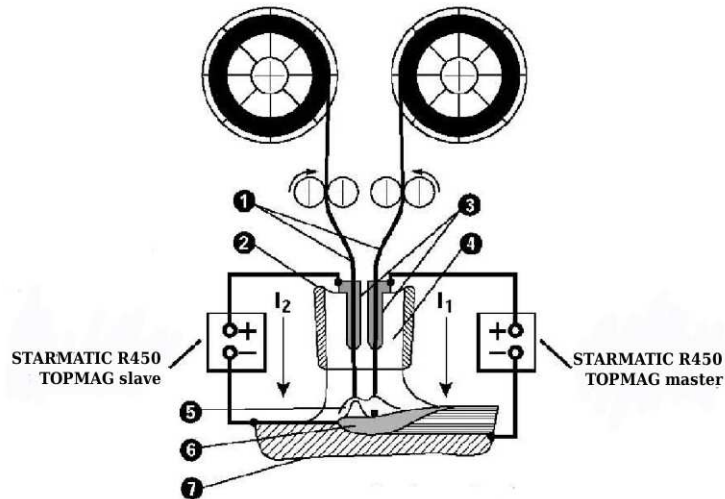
A sketch of tandem arc welding. The following notation is used: 1-wire; 2-gas nozzle; 3-contact tubes; 4-shielding gas; 5-electric arc; 6-molten pool; 7-part to be welded (www.saairliquide.com).
